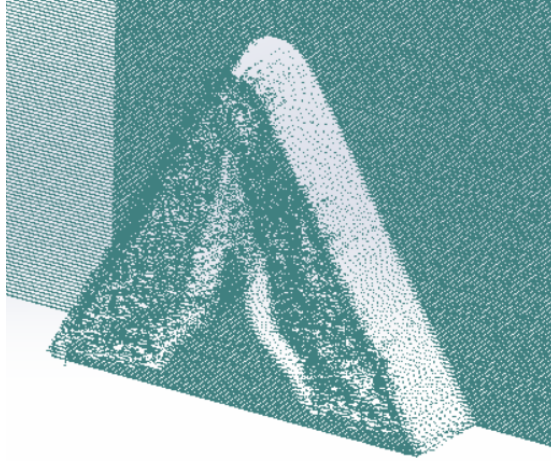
Turning tool chip breaker geometry (point cloud)
